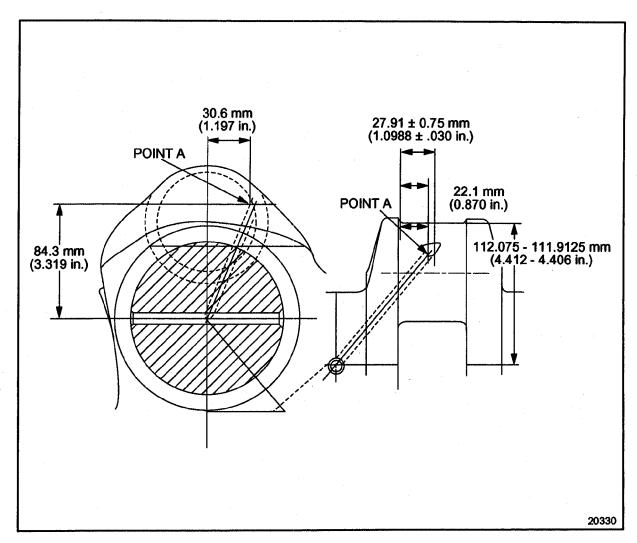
Oil Hole Specifications - Connecting Rod Journals - 12.7 L Crankshaft (160 mm stroke)
